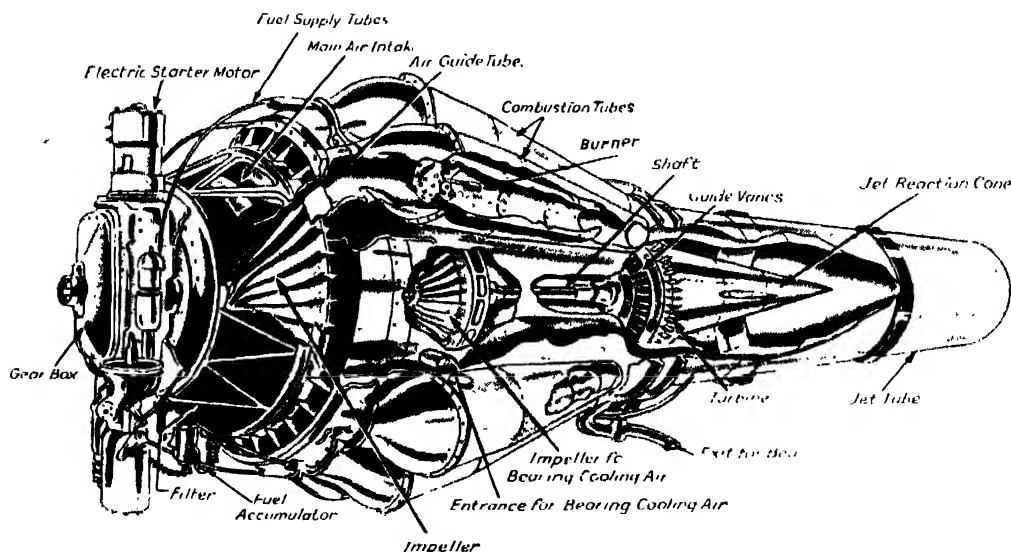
JET ENGINE. An electric starter-motor turns the blades of the impeller which draws in and compresses air which is forced into the combustion tubes. Each tube has a jet through which a spray of paraffin burns, causing the highly compressed air to expand quickly, and force its way out through nozzles against the blades of the turbine. Turbine and impeller being mounted on a common shaft, the engine is self-acting. After passing the turbine blades, the air and paraffin mixture is forced to the rear of the engine and reacts against the cone, causing the engine and the aircraft in which it is fitted to move forward. A jet engine creates inside itself great heat, and to prevent the parts from becoming too hot a small impeller draws air through ducts into the engine. The cooling air then passes out through vents.
